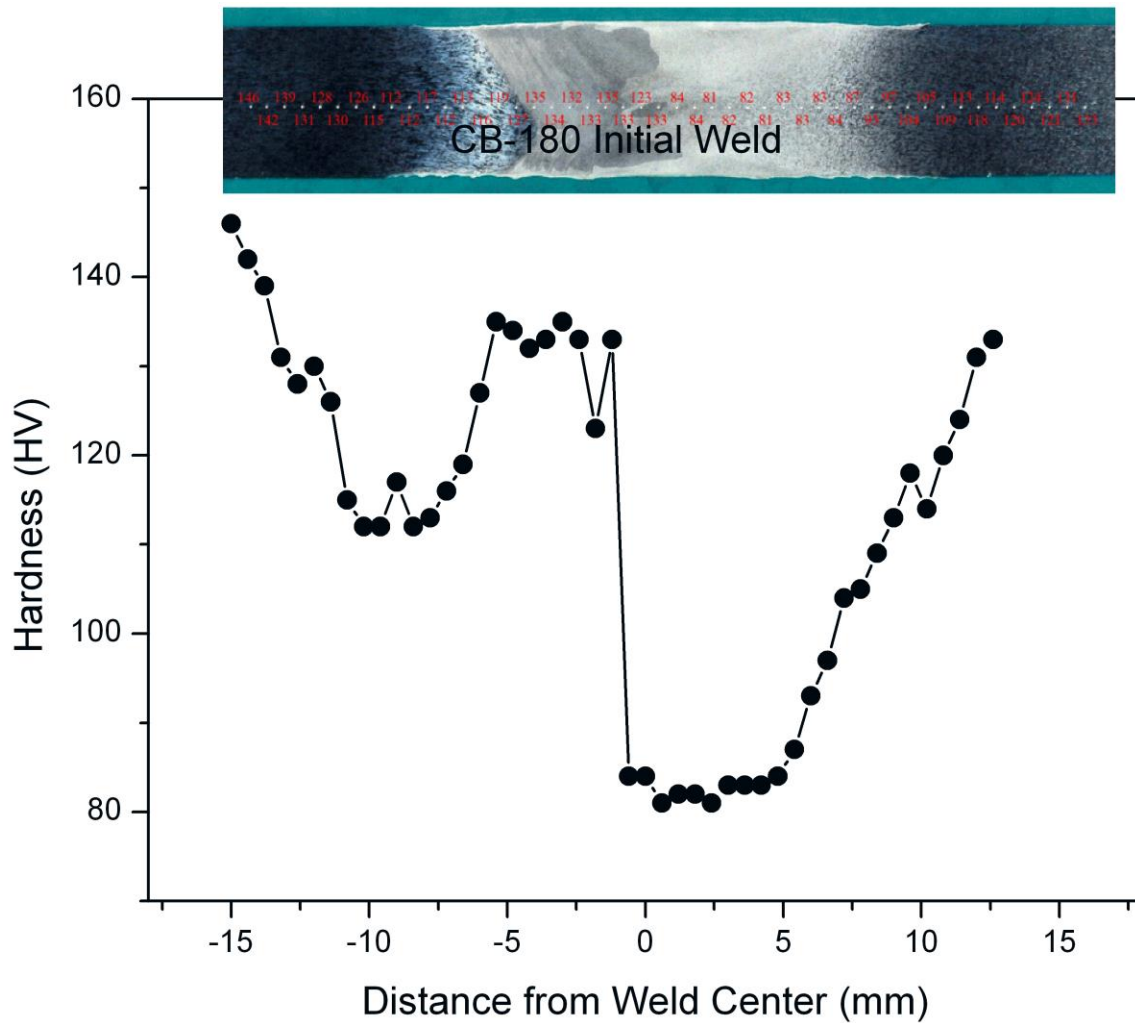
Macrograph and hardness profile of CB-180 initial weld.
